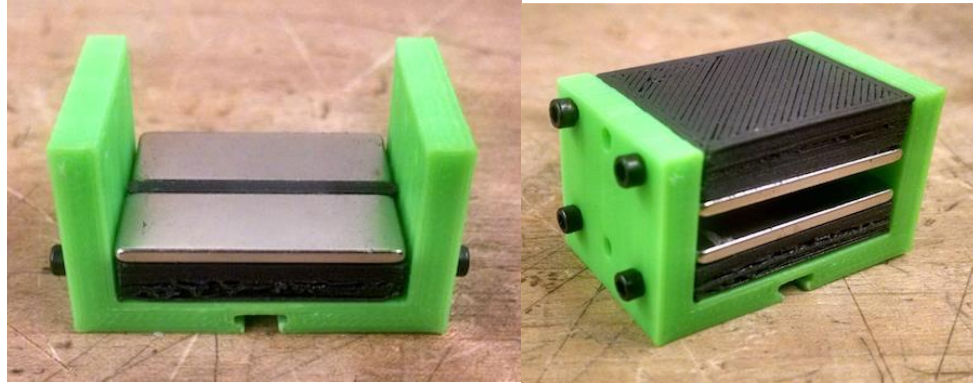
Assembly of fully 3D printed magnetic cart with big magnets v1.2.0
